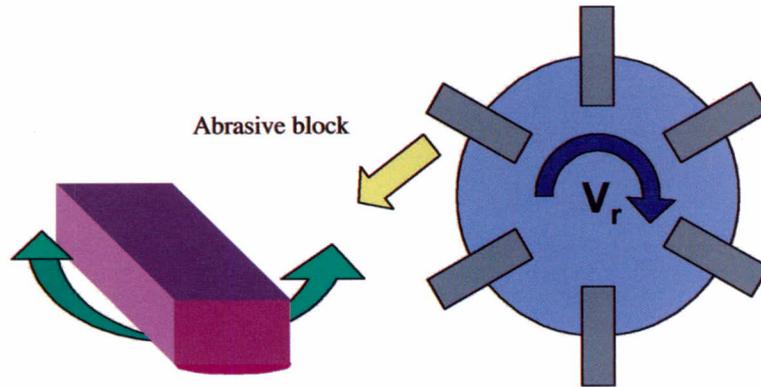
Schematic diagram of typical swinging head grinding tool used in industrial polishing process.
